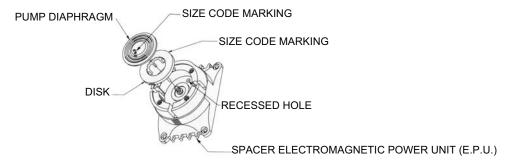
Pump Diaphragm Removed from Pump Head Spacer.
